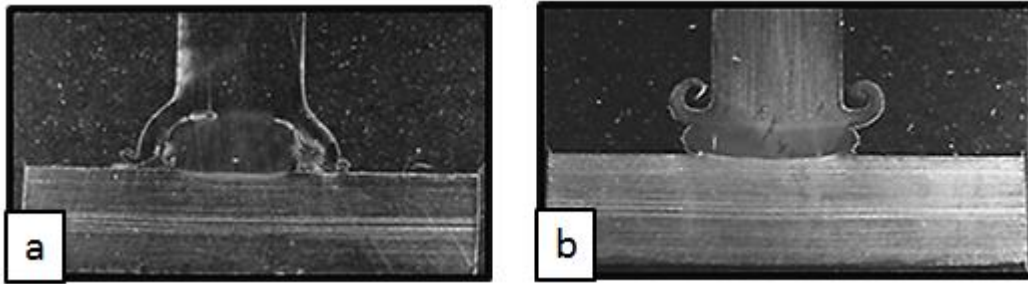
Low a) and High b) Friction Pressure Friction Stud Weld joints [33]
